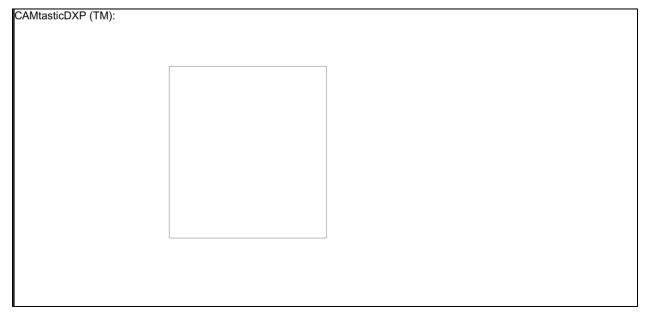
PCB Gerber File of the PCB Outline. We used this to create an outline of the PCB and cut out a piece out of the larger clad board.
